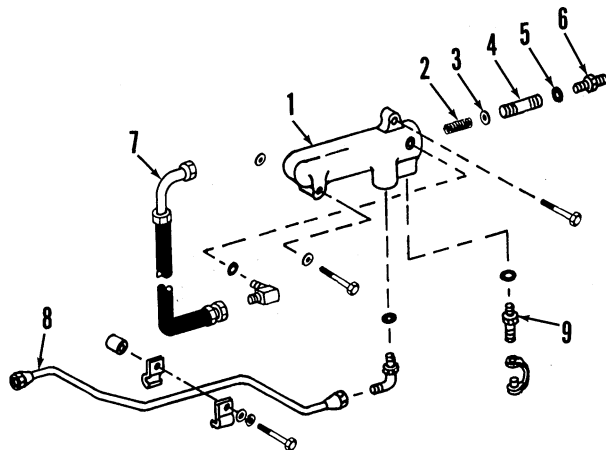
Exploded view of pressure control valve and hydraulic connections used on tractors with Quad-Range transmission. Power Shift models are similar.
